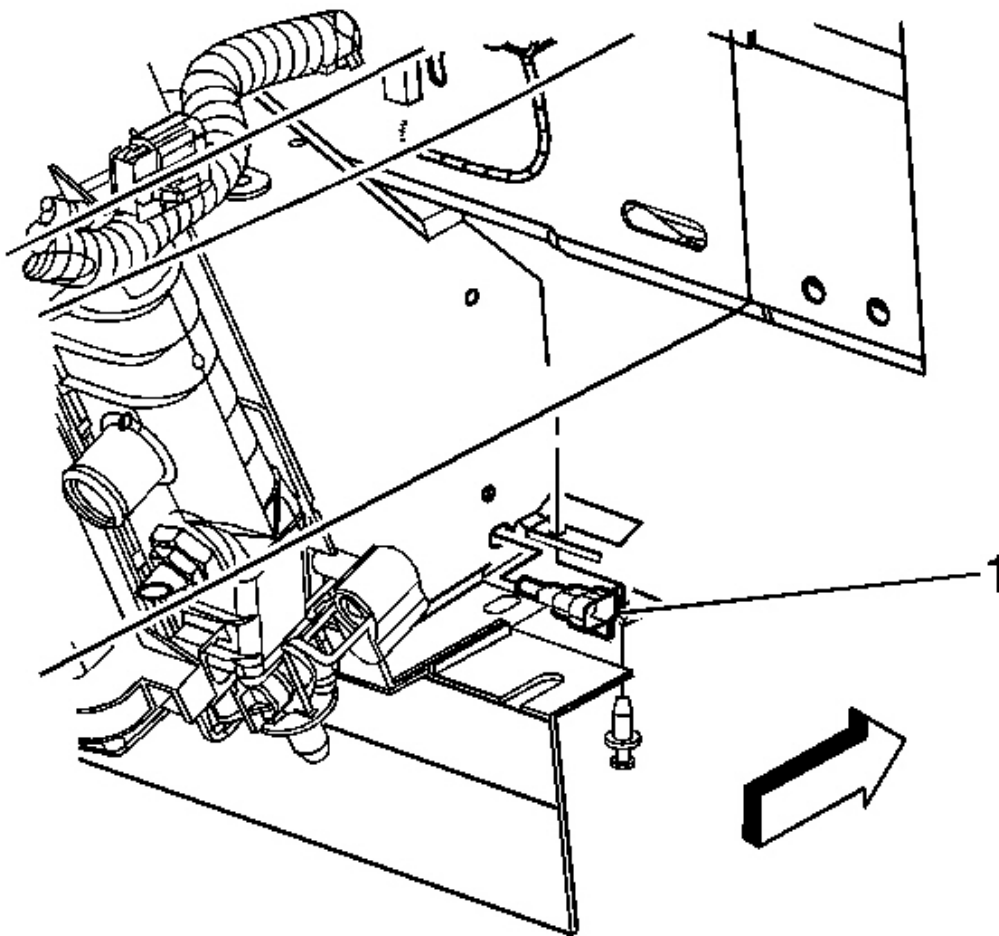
Identifying Ambient Air Temperature Sensor & Electrical Connector At Radiator Support
